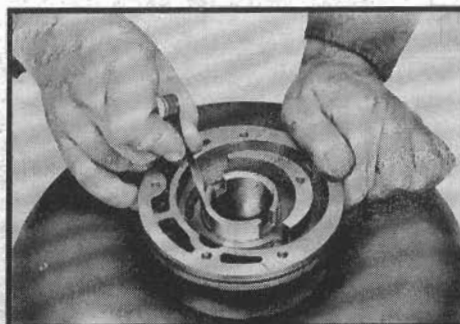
Measuring clearance between pump body bushing and converter pump hub. 1953-59
